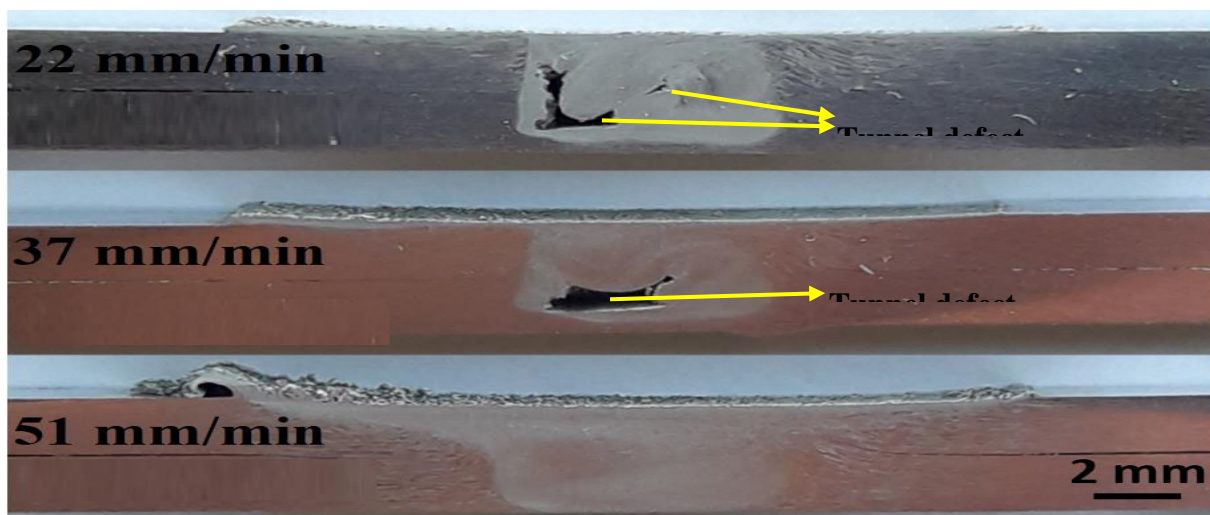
The cross-sectional appearance of FSLW joints produced at different tool feed rates
